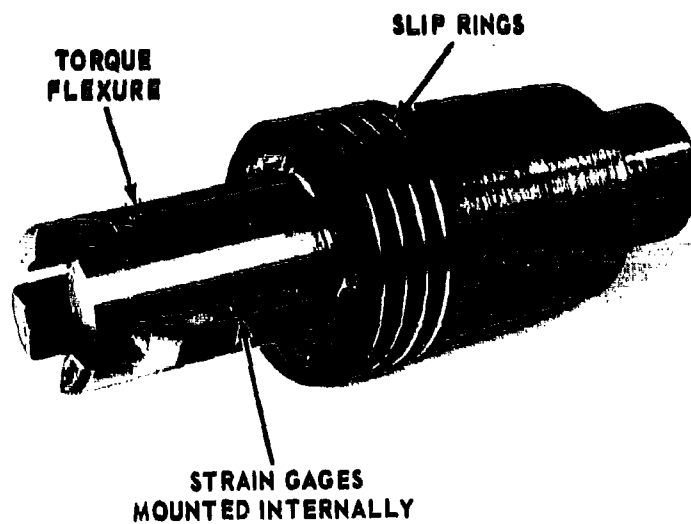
Close-up View of Instrumented Spindle Adapter
